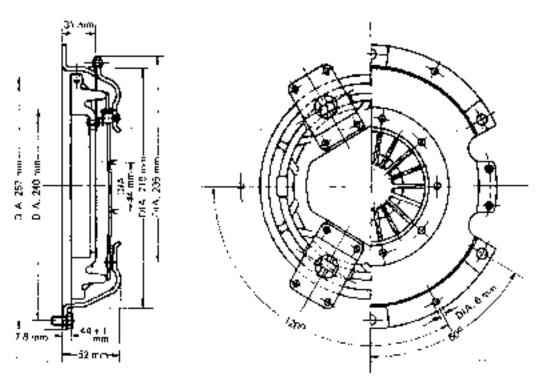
Clutch Cover Assembly (Diaphreym Spring-Type)
